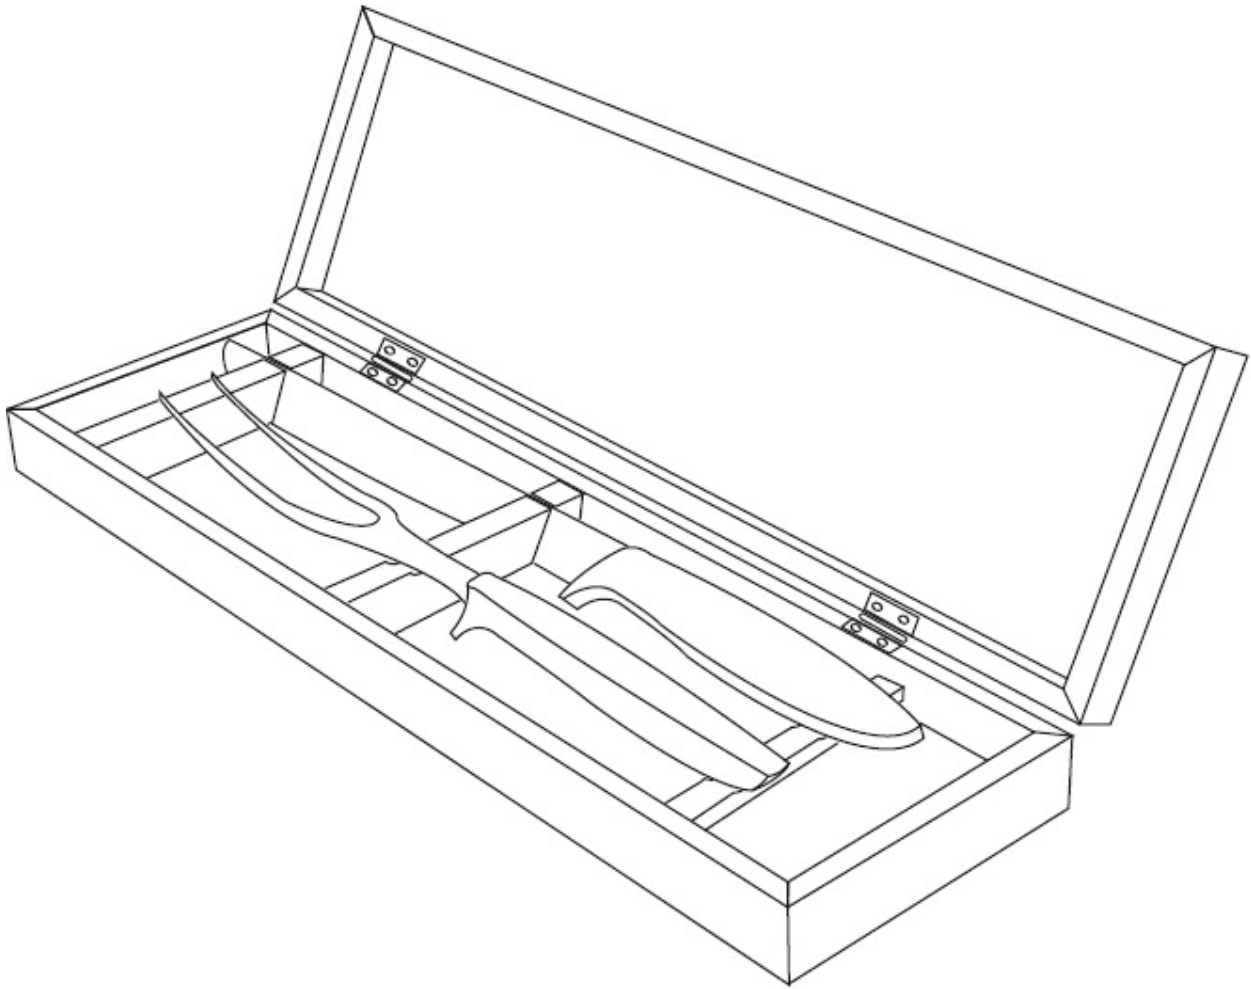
E-D2. A Different Knife and Fork Holder. Three little cross-bars can be used to hold the utensils instead of cutting holes in the bottom tray. Two bars are cut to hold the blade. One bar is notched to hold the fork.
